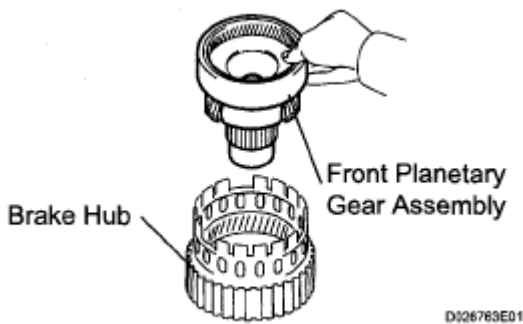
Removing Front Planetary Gear Assembly From Brake Hub
